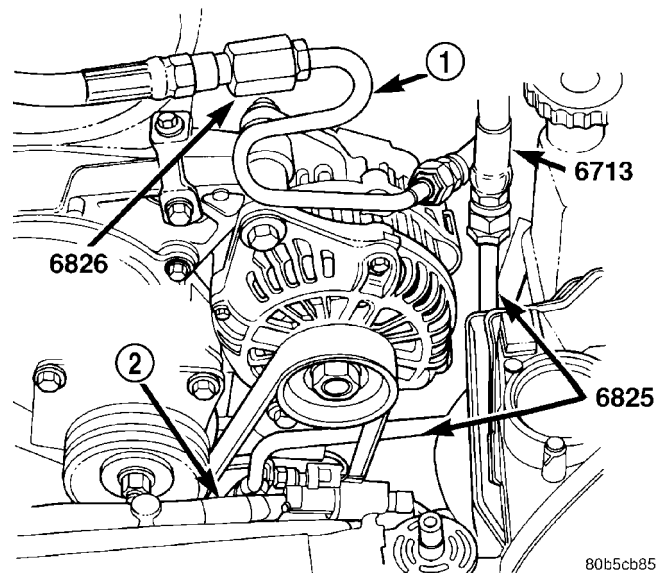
Analyzer Connected To Power Steering Pump (/3.5L Engine)
